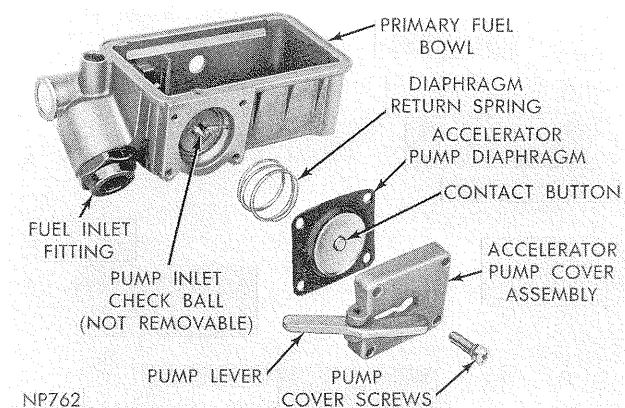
Accelerator Pump, Disassembled Ball Check Valve
